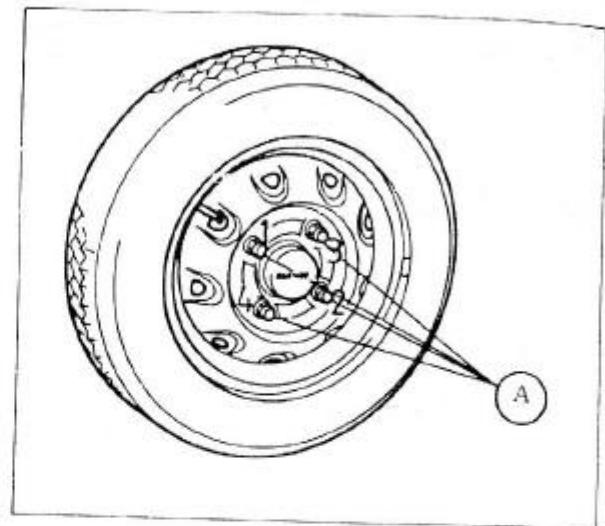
F — 13 TIGHTENING OF WHEEL NUT
